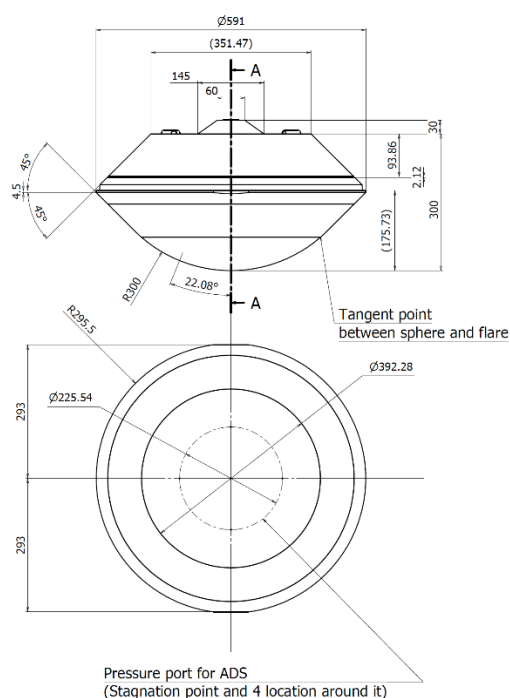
Drawing of the SRC experimental vehicle (dimensions: mm)
